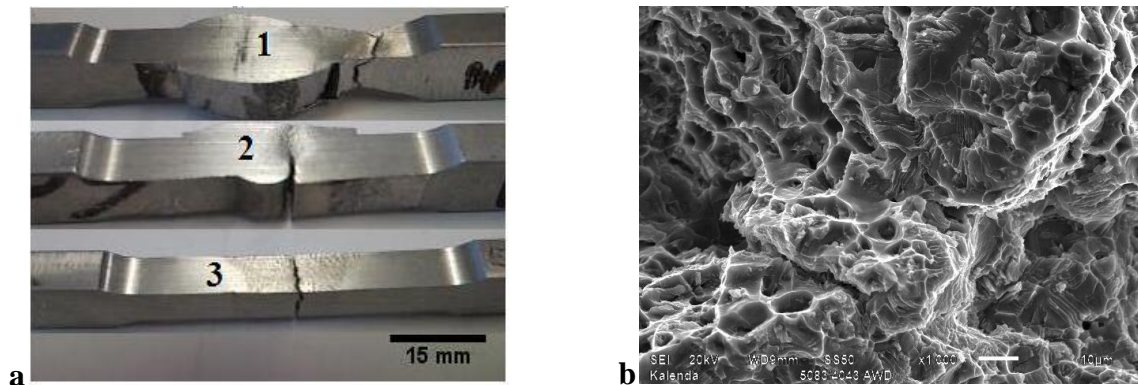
Fracture (a) (1) MWD, (2) AWD and dress weld (3) and (b) weld fracture
